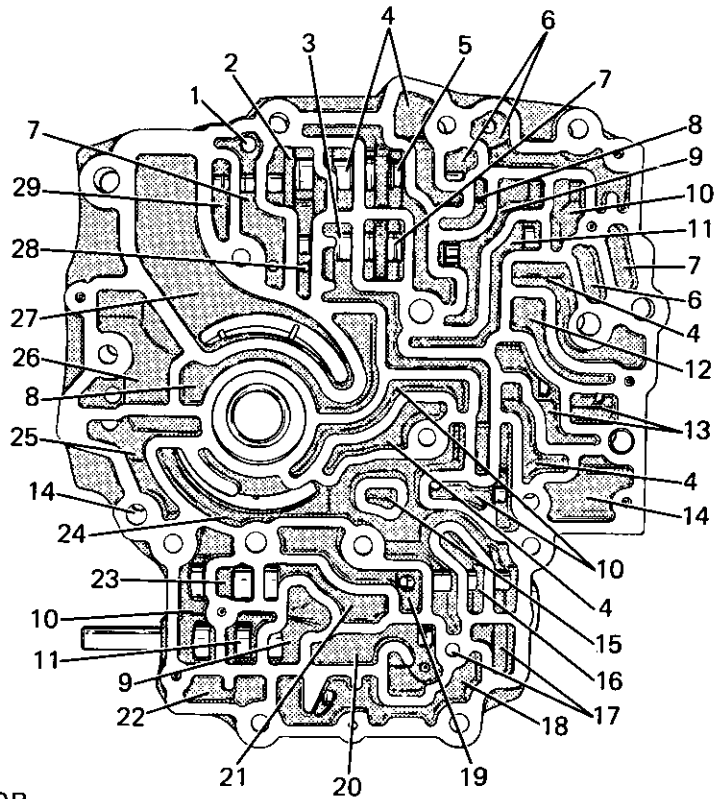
Converter Oil Passages - Parts Cut-Away View
